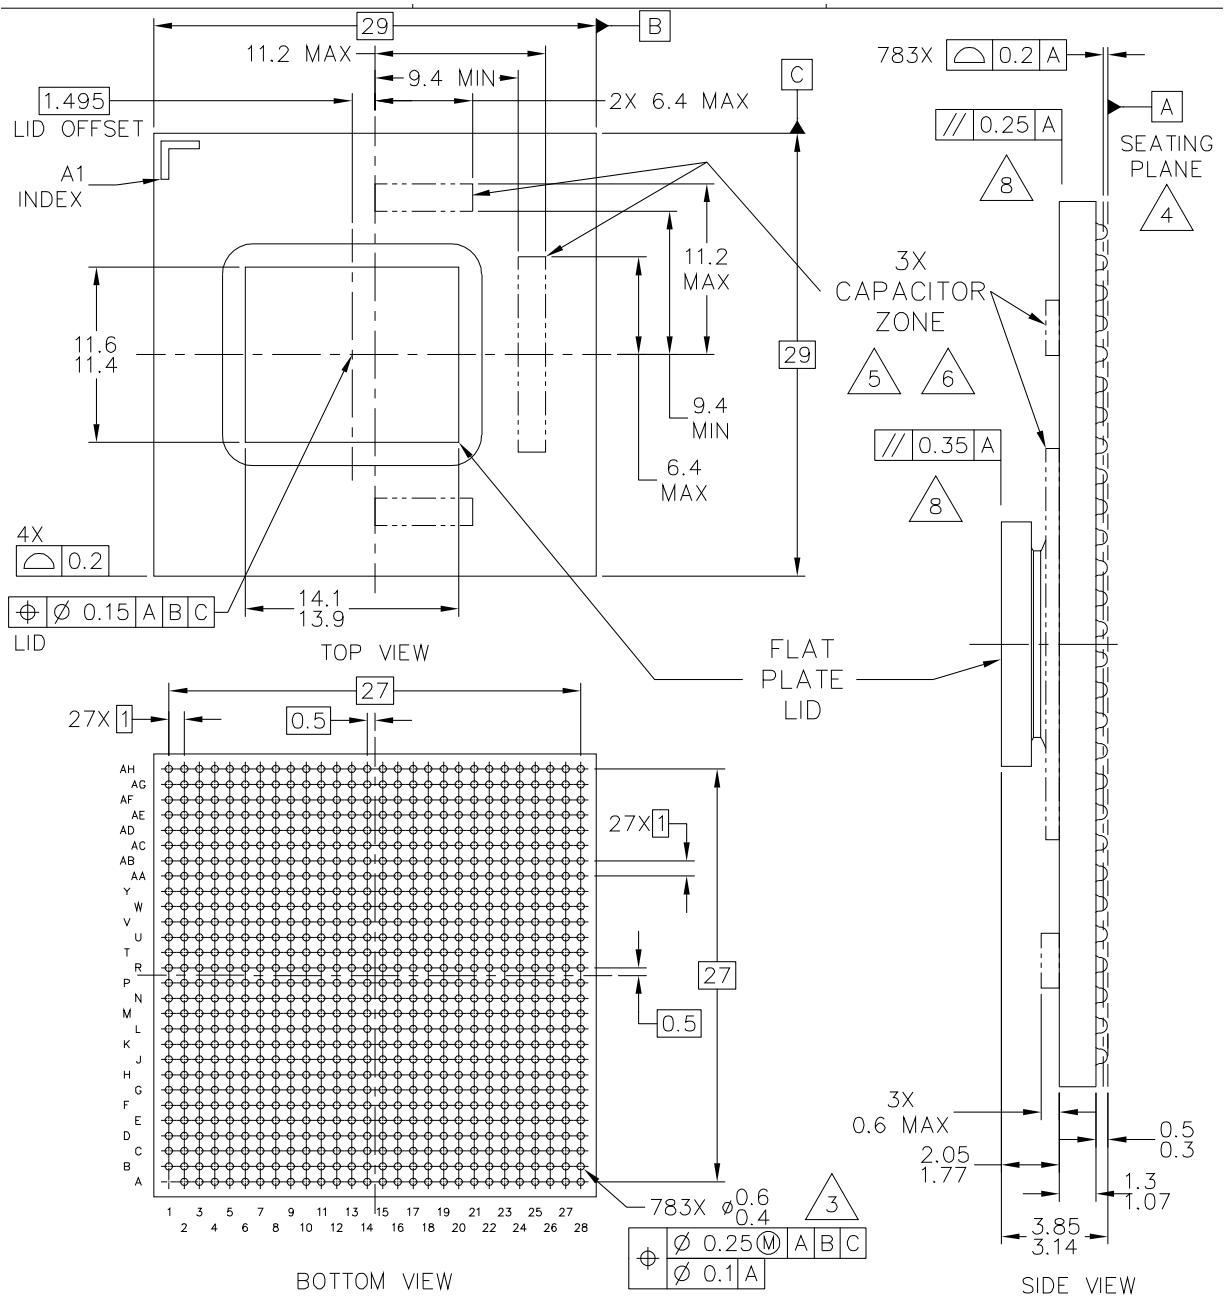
Mechanical Dimensions and Bottom Surface Nomenclature of the MPC8560 FC-PBGA
